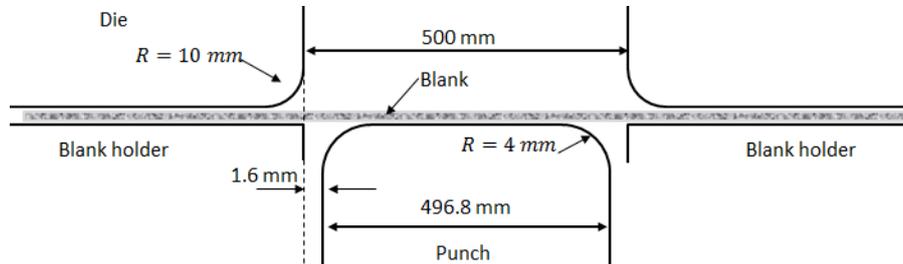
A schematic of tools and dimensions for the U-draw bending.
